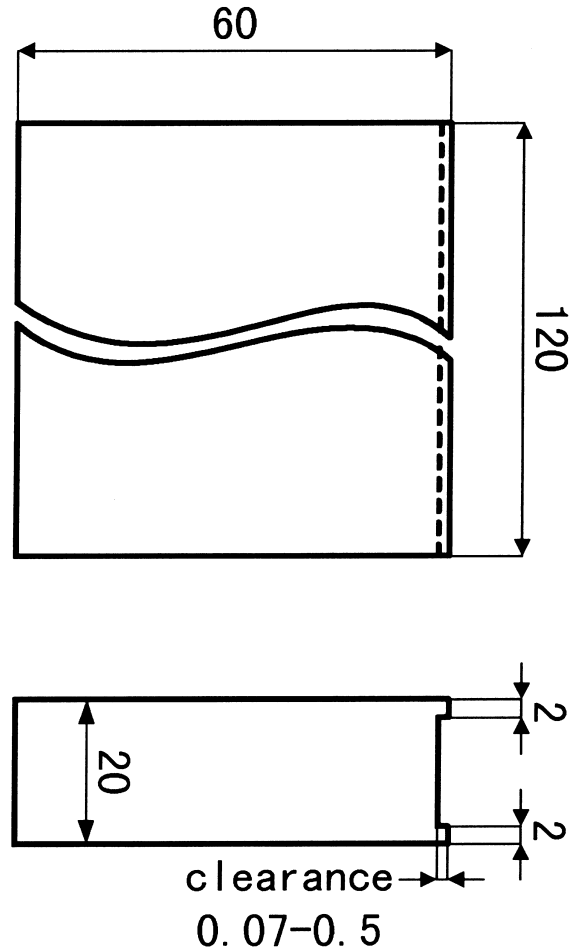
Configuration of brazing surface of stainless steel to control brazing joint clearance (mm).
